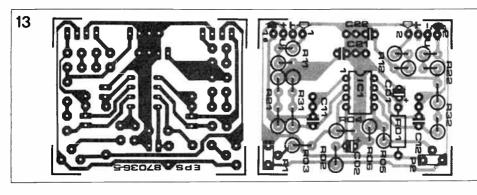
This PCB holds the output low pass filters, and can be plugged onto the main busboard shown in Fig. 10.
